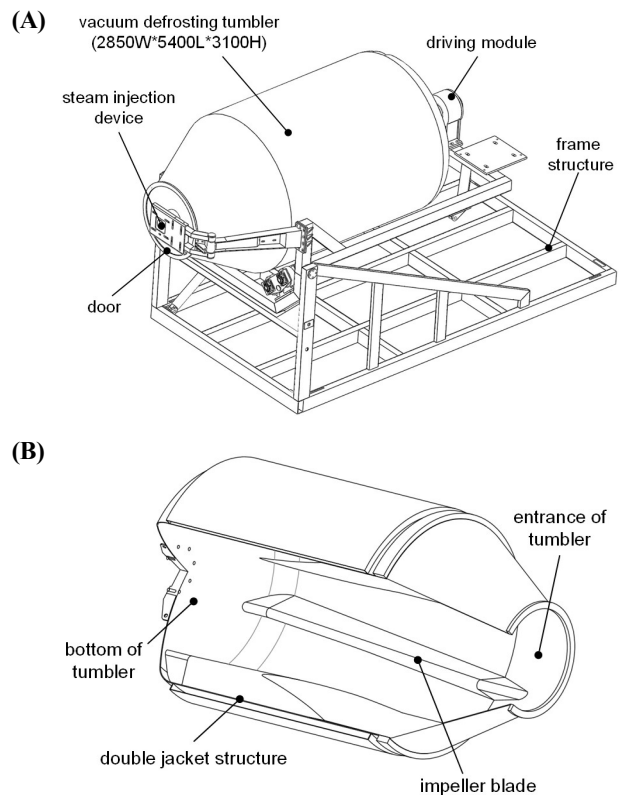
Layouts of 6 ton-scale vacuum defrosting tumbler. (A) full model and (B) cross-section view of tumbler. System includes a metallic tank (6,000 L) composed of double jacket structure, steam injection device, and 4 impeller blades.
